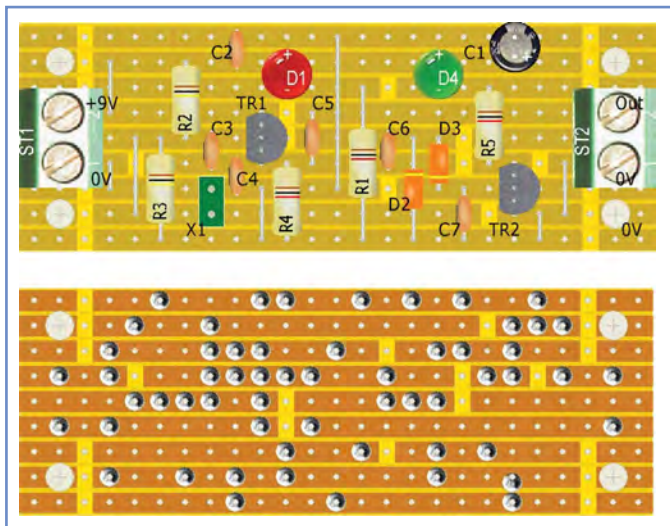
Stripboard layout of the Handy Crystal Checker
